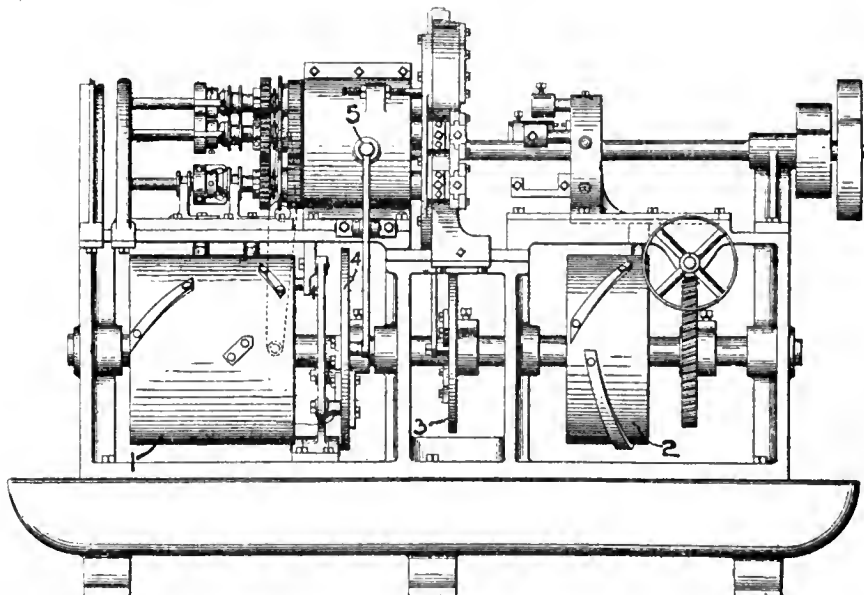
SPENCER TYPE E MULTIPLE SPINDLE MACHINE SHOWING USE OF STRAP DRUM CAMS—NEW BRITAIN MACHINE CO.
